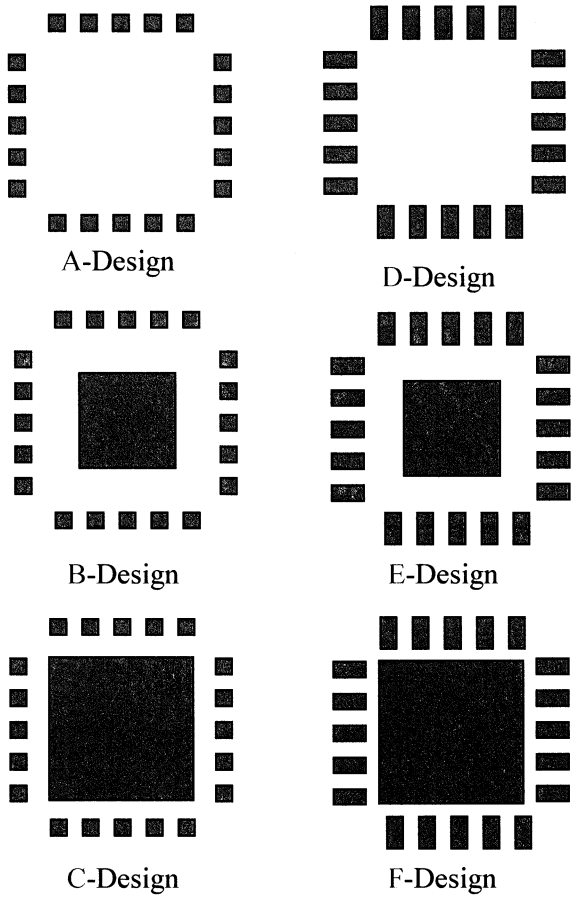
Schematic drawing of the solder joint geometry of designs A to F.
